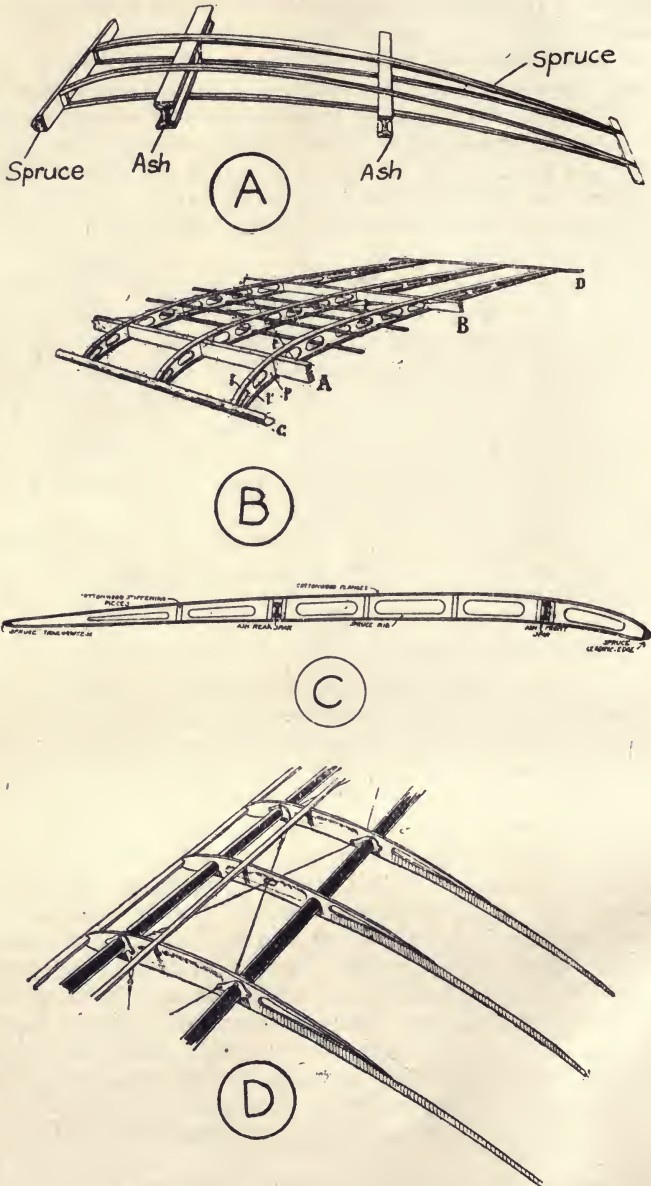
METHODS OF CONSTRUCTION OF AEROPLANE WINGS.
